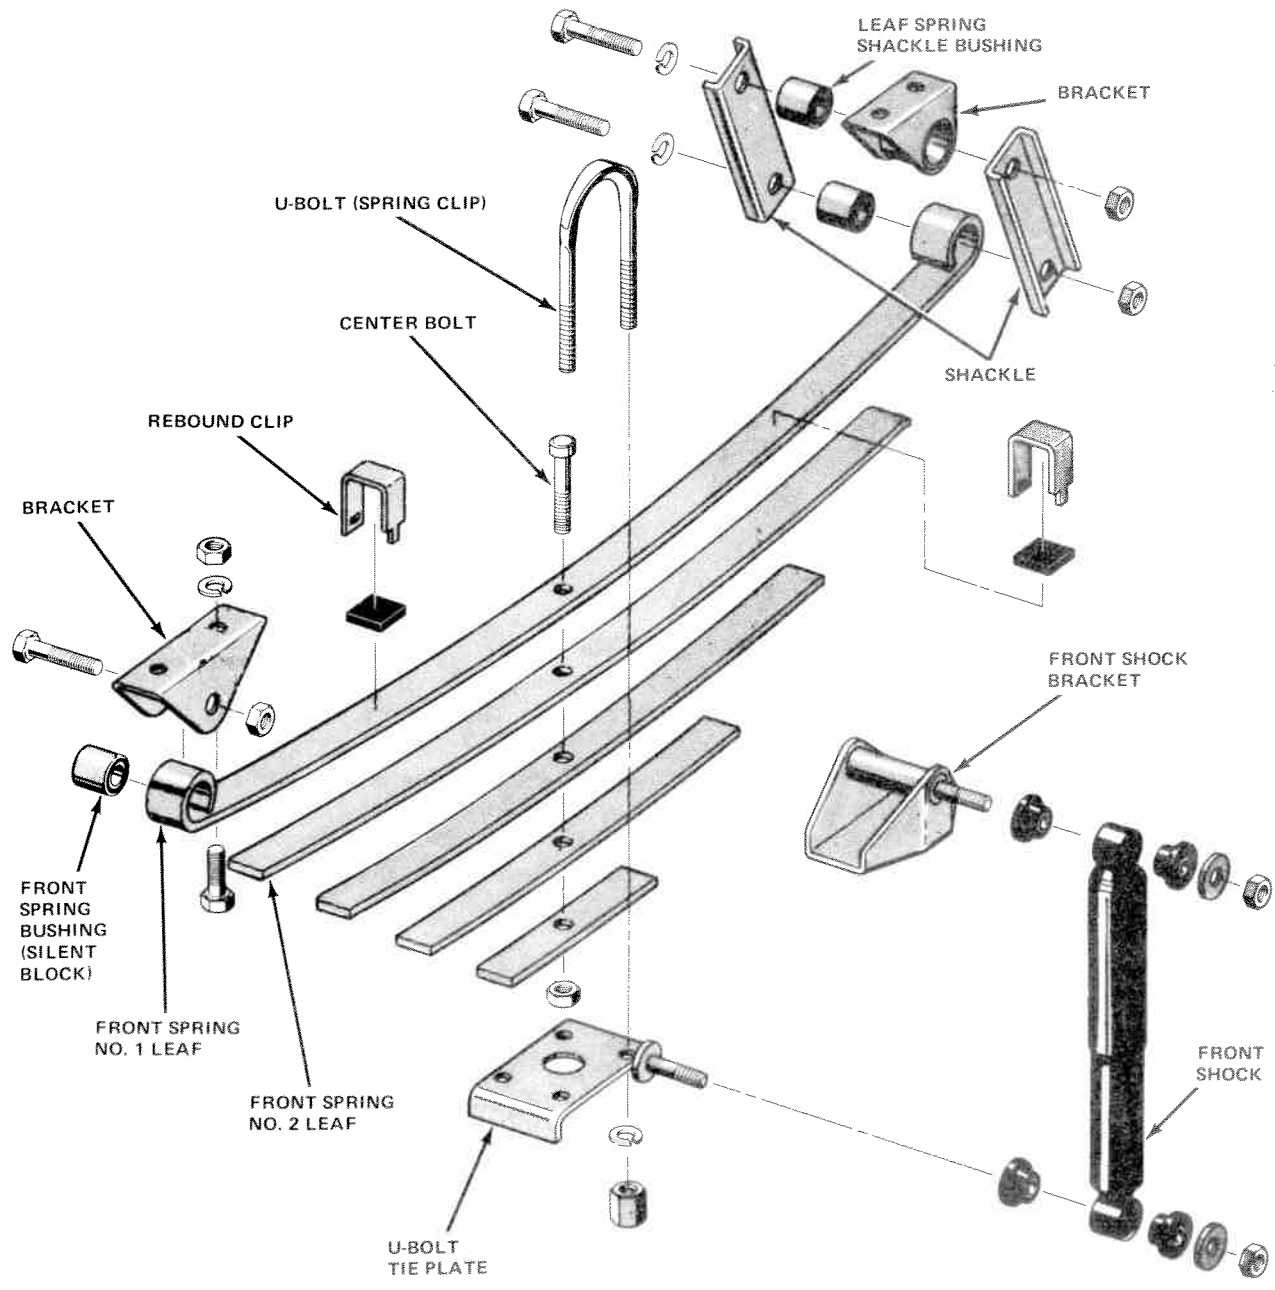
Front Spring and Shock Absorber - CJ Models
